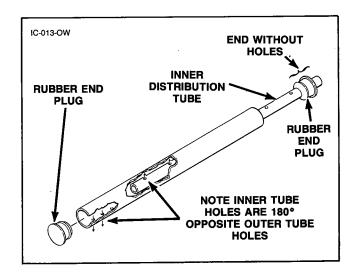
DISTRIBUTION TUBE DISASSEMBLY
